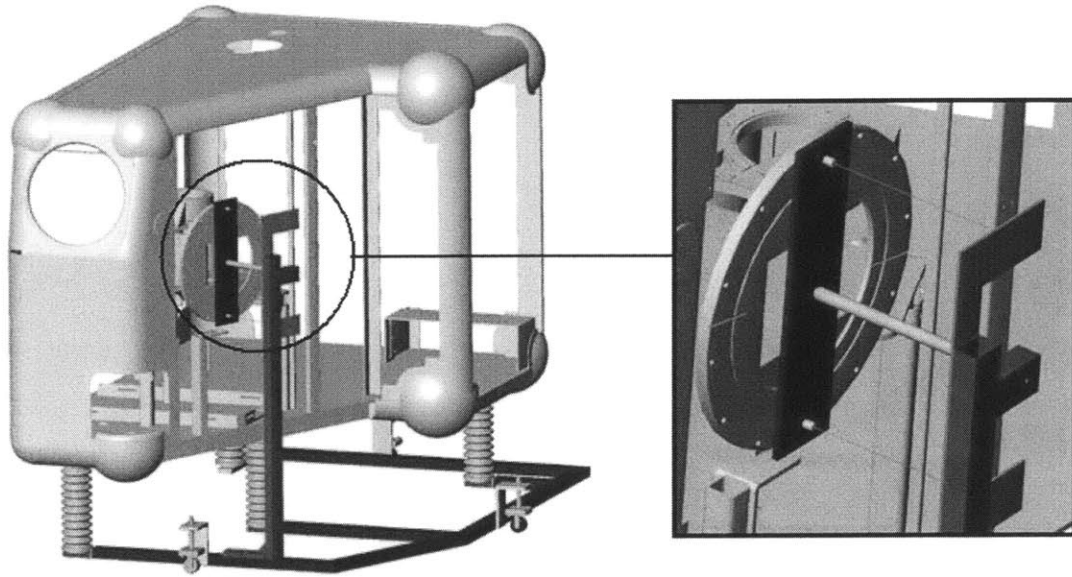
Source Chamber Alignment: general and particular view of the fixture
